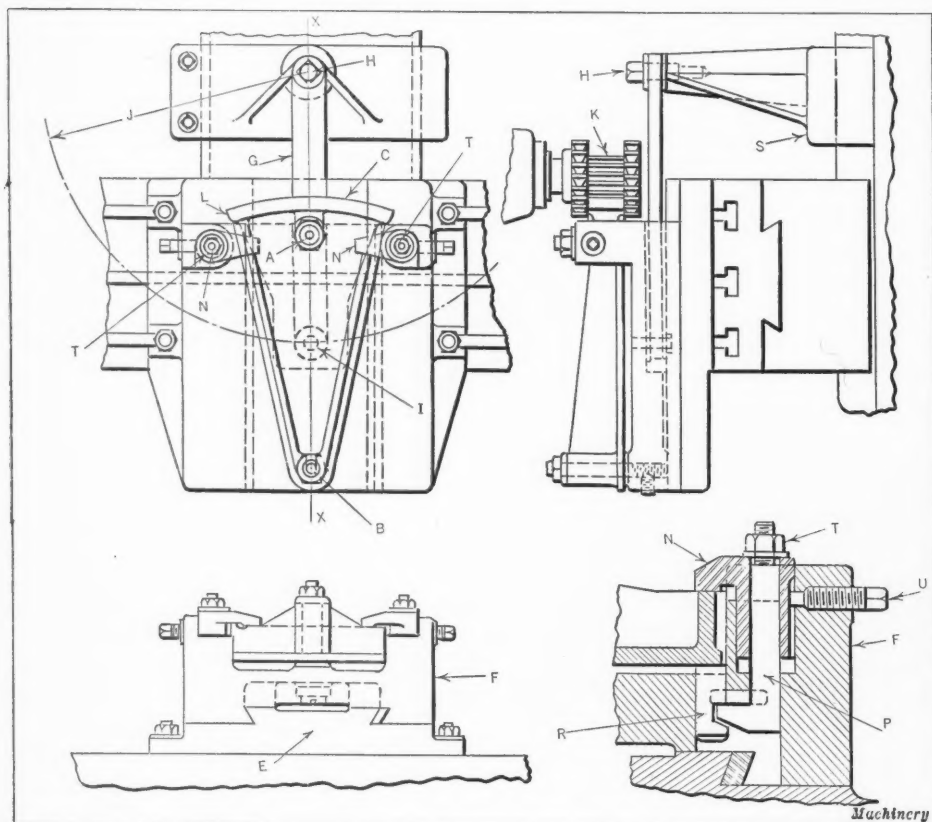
Fixture for milling Radius on Sector shown in Fig. 1
